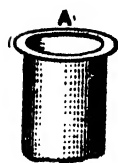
Appearance of Properly Flanged Tube or Pipe
